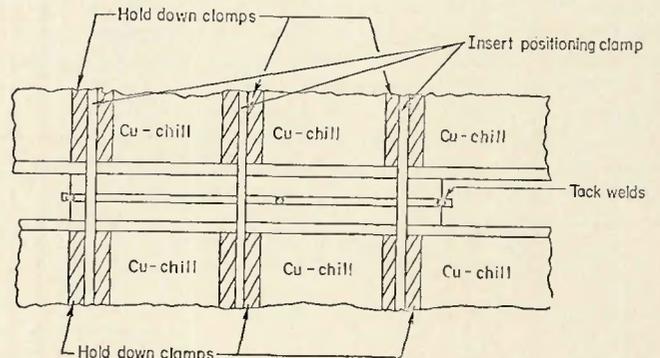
Joint configuration and tooling for production of the weldments
